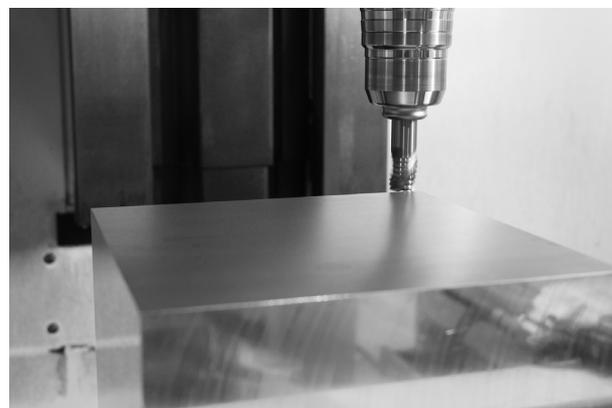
Experimental setup for machining aluminum alloy using machining center
